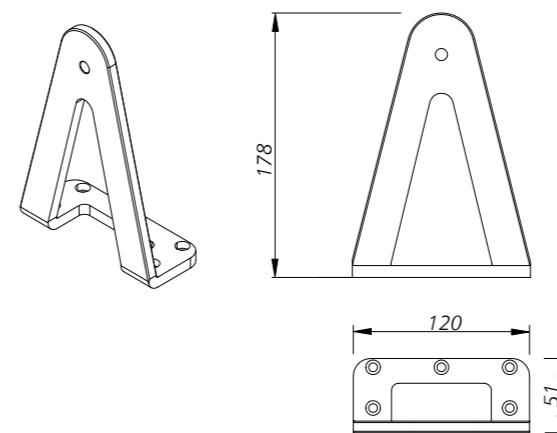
Bottom bracket for mounting type S spindle actuator on the smoke exhaust window, dimensions [mm]
